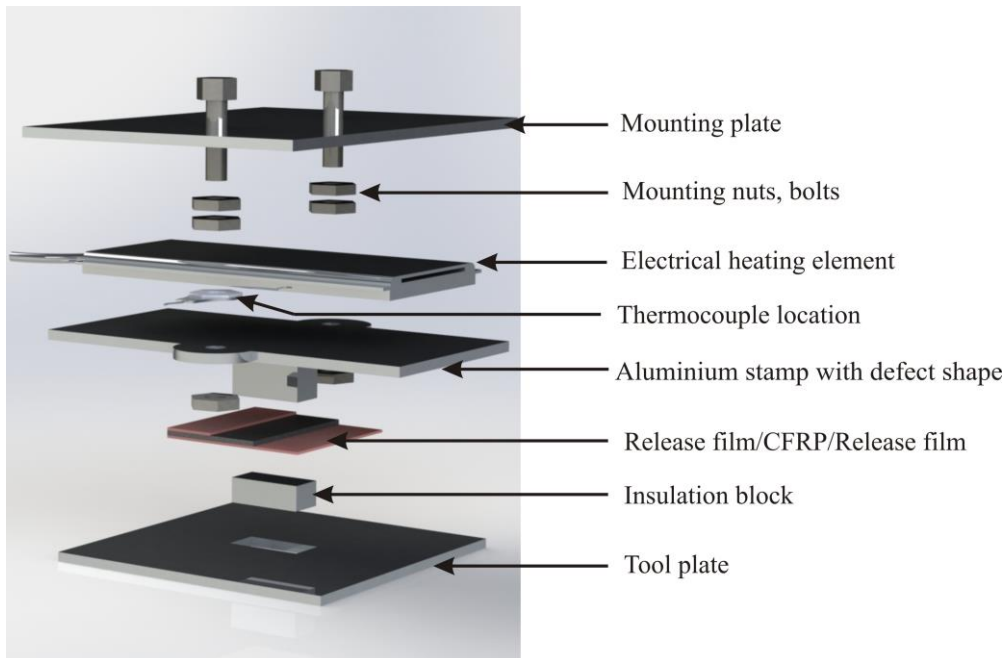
Exploded view of equipment used to pre-cure areas of individual plies
